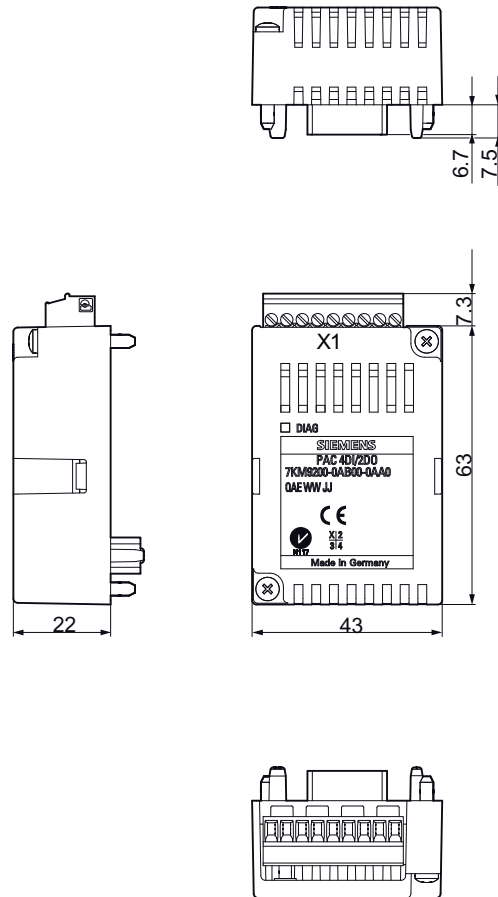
View from above with the dimensions of the plug connector between the SENTRON PAC 4DI/2DO expansion module and the SENTRON PAC, side view, front view and view from below with terminal block
